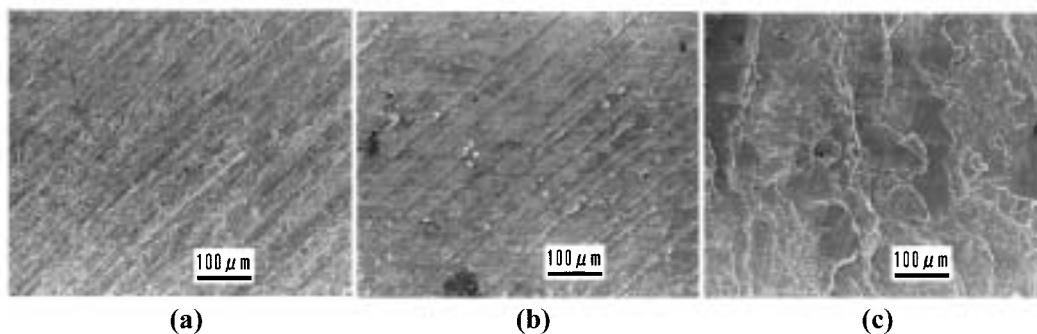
SEM photographs showing steel faying surfaces before and after welding when the welding direction was reversed : (a) Before welding, (b) after welding with the thrust distance of 0.2mm and (c) after welding with the distance of 0.4 mm.
